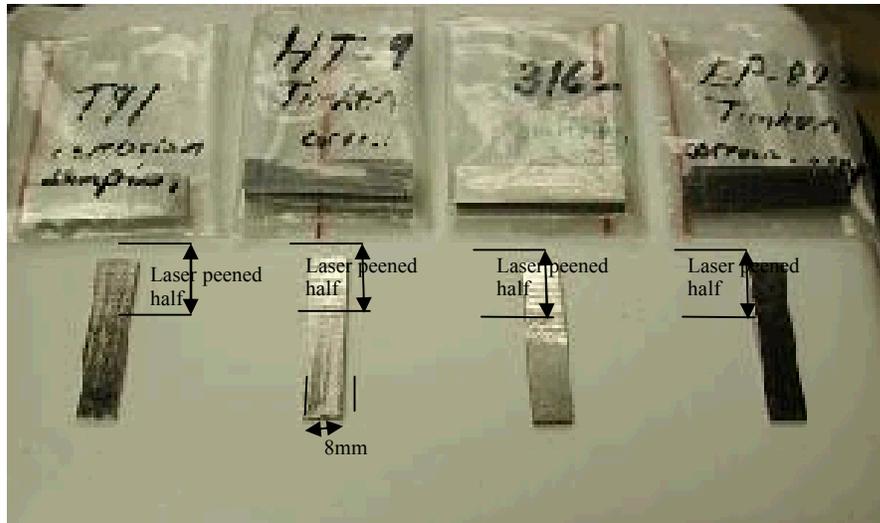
T91, HT9, 316 L and EP-823 samples after laser peening.
